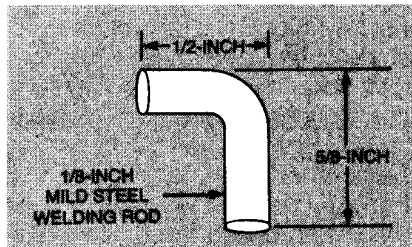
The vibration sensor is formed from pieces of welding rod. This piece supports the spring.
